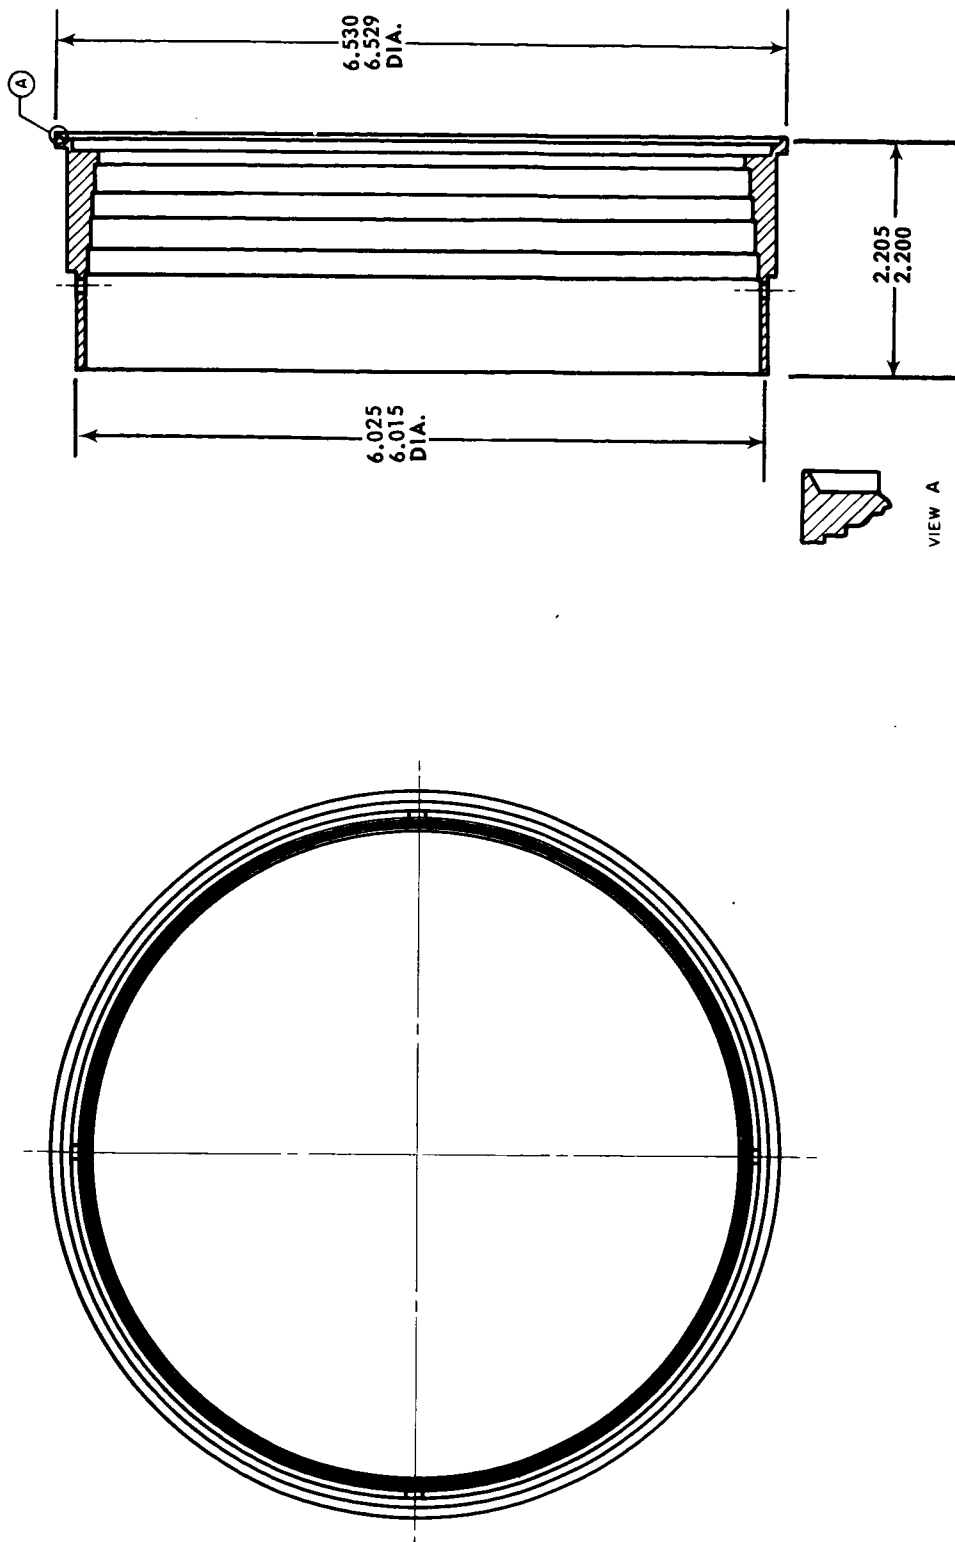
Bore Guide for Face Contact Bellows Secondary Seal
